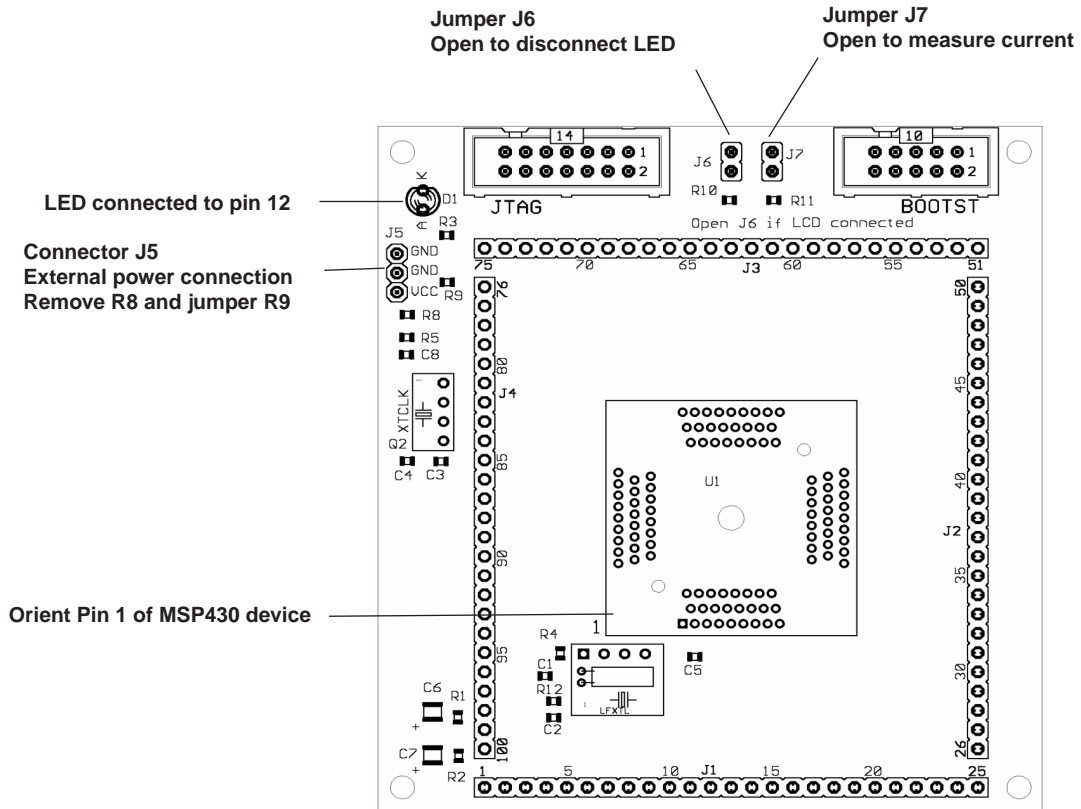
MSP-TS430PZ100 Target Socket Module, PCB
